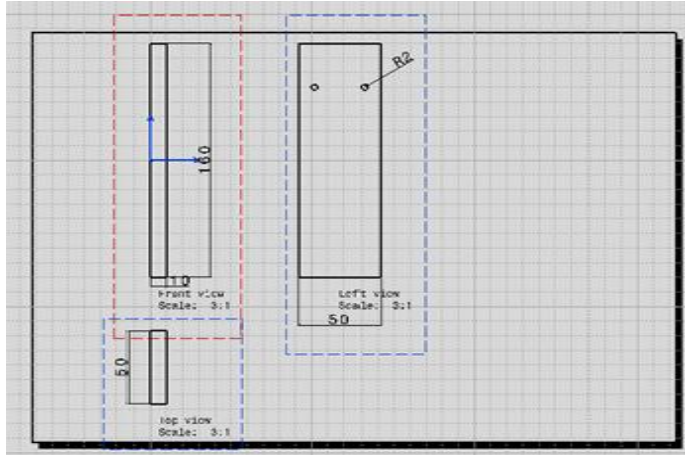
Agitator Impeller blade dimensions 45° pitch blade
